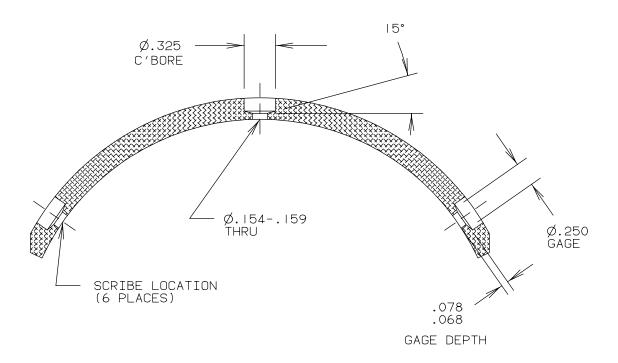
Installation of 066-00504 Lining to Brake Shoe
